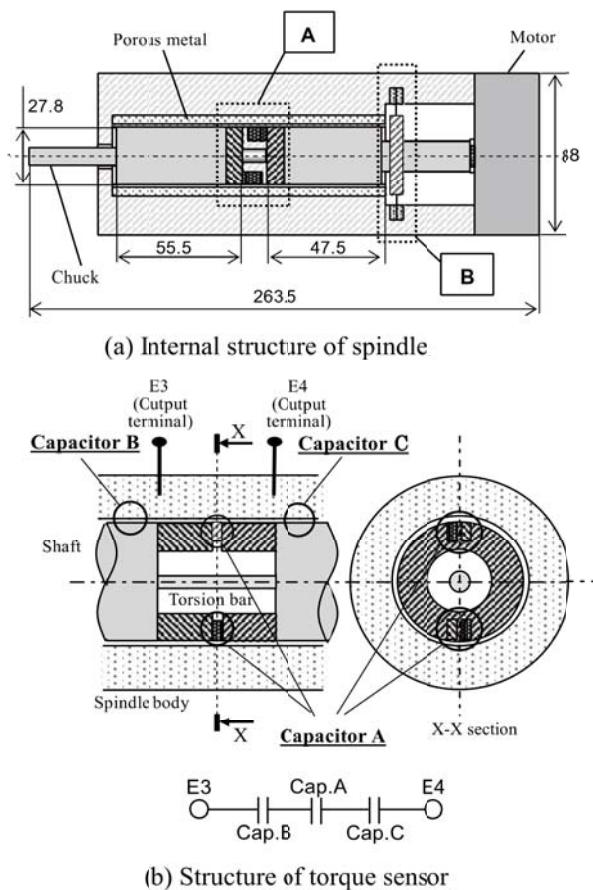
Built-in-spindle for microdrilling using cutting force detection mechanism [51].
